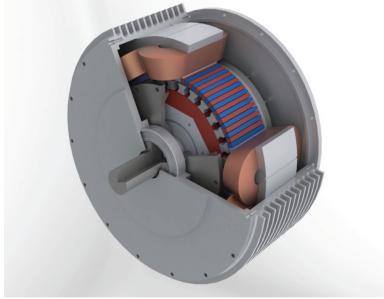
Combined magnetic gearbox and generators (Courtesy of Magnomatics).
